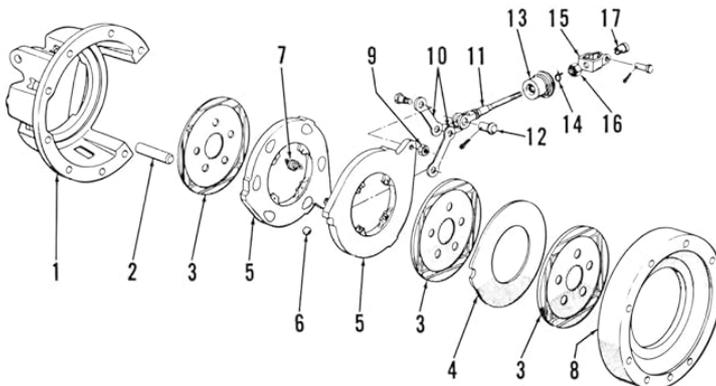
Exploded view of brake assembly used on Models 4100, 4110, 4600, 4610, 4600SU and 4610SU. Brake inner housing (1) is same as (21— Fig. 202) and outer housing (8) is same as (19— Fig. 202).
